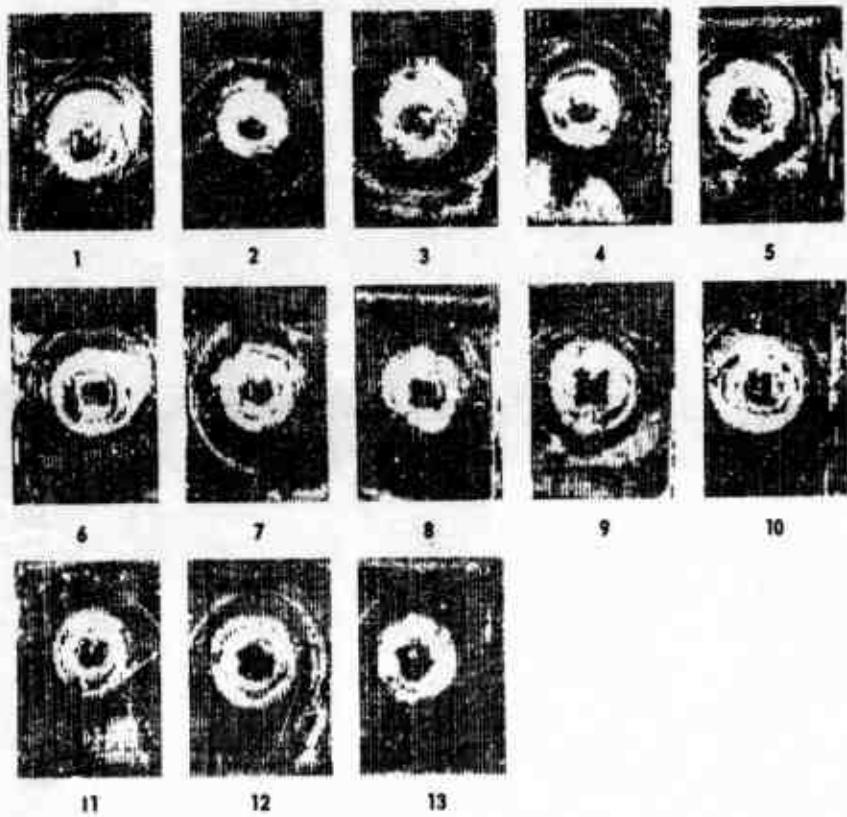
C-Scan Record of Series 5 Welds.
